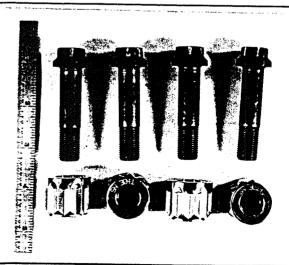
(left).- Test specimens after tensile strength evaluation. All ZipNuts exceeded minimum tensile strength requirements, with 1 bolt fracture, and 3 nuts stripped threads.L
